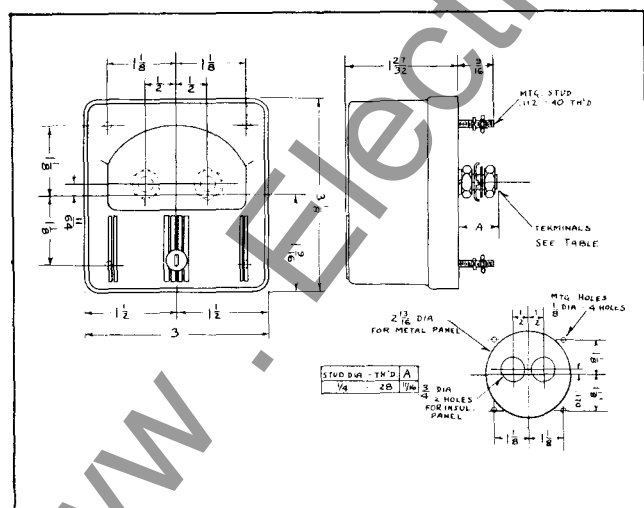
Outline and Drilling Plan of the Projection Type Test Milliammeter. For Reference Only.
